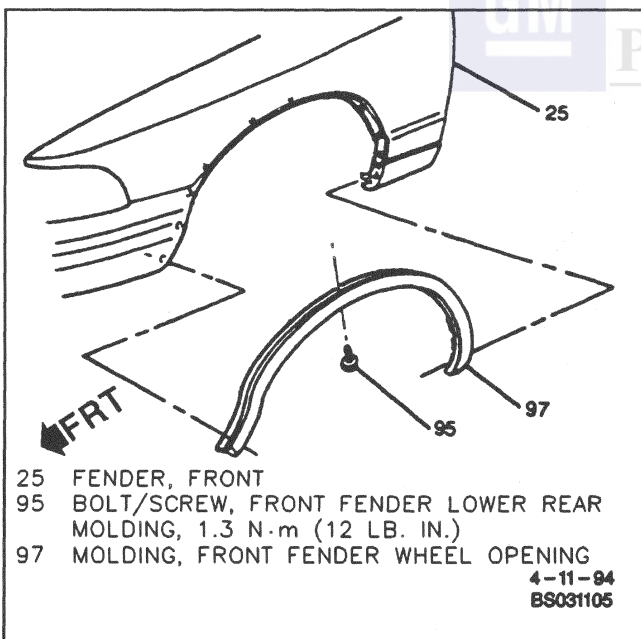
Front Fender Wheel Opening Molding-(Chevrolet)
